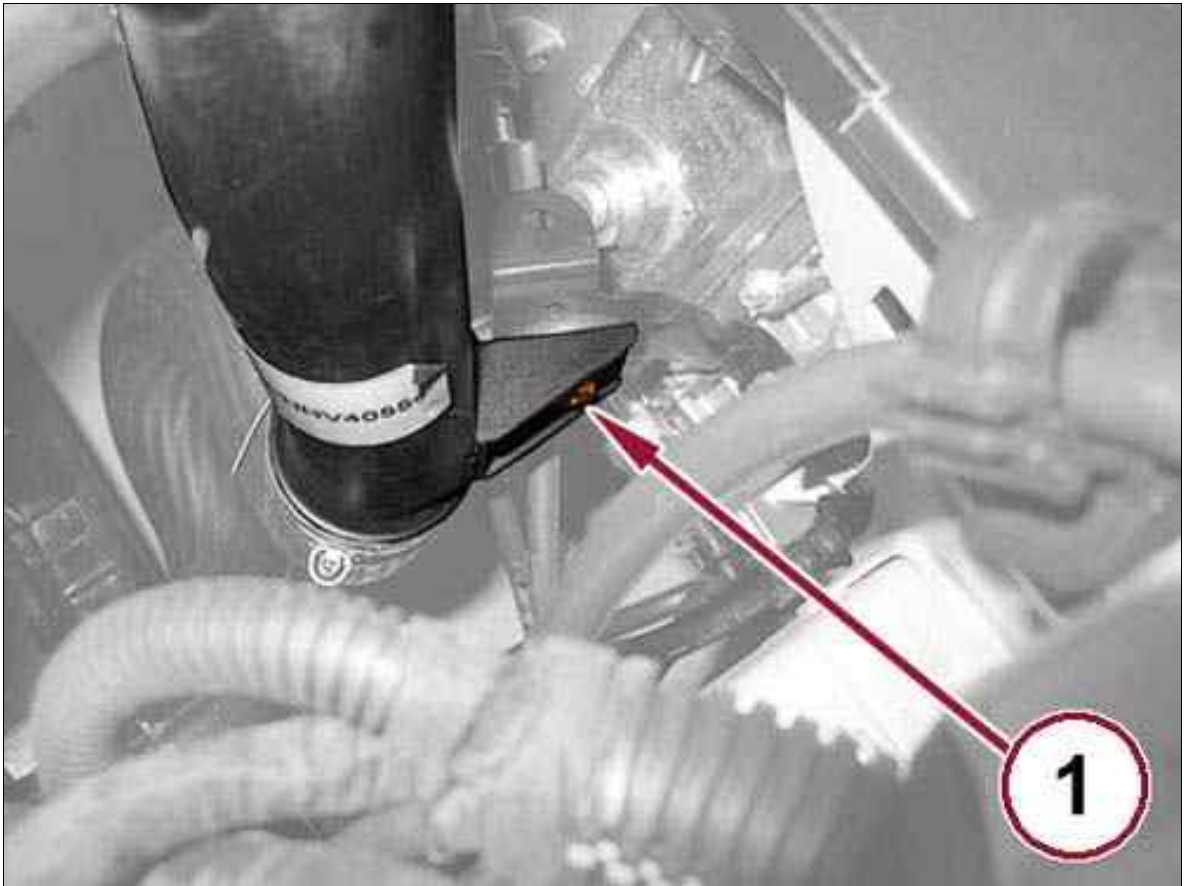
Retaining Clip & Quick-Disconnect Fitting
